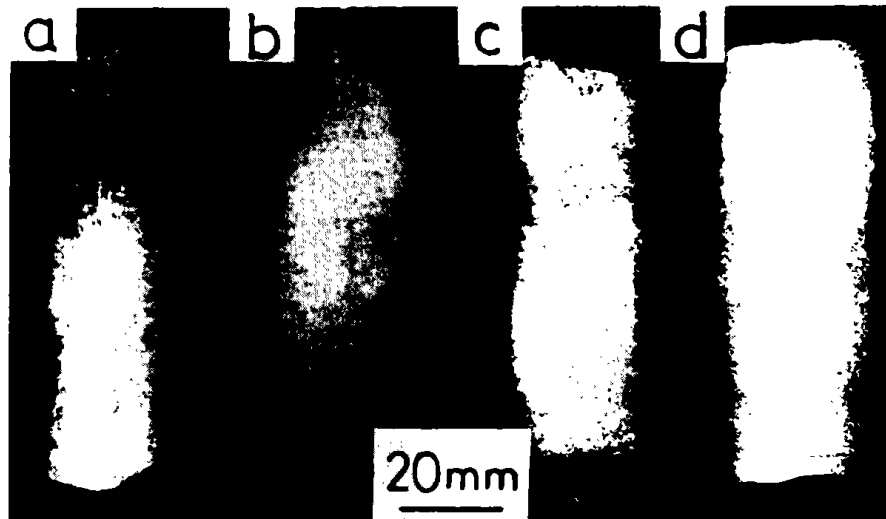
Sintered iron sheets after reduction and hot-rolling.
